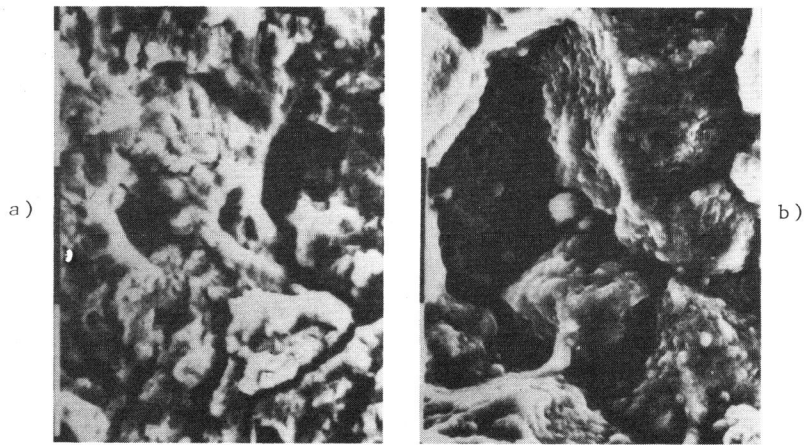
Fracture surfaces in H13A tool steel at 500° C.
